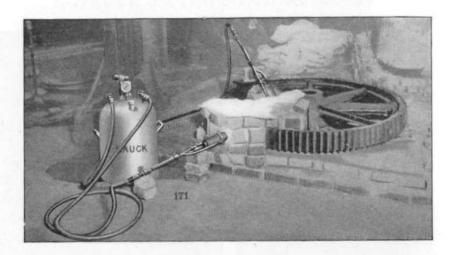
A Hauck Double No. 8 Burner Outfit preheating large gear wheel.
